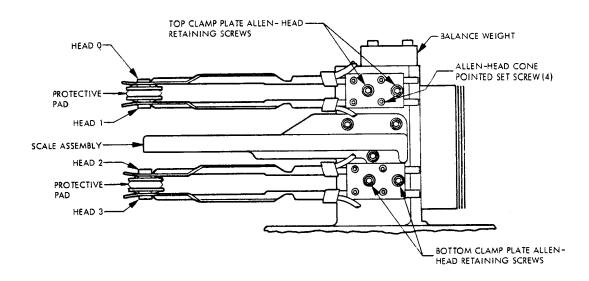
Heads Installed on Positioner Carriage (200 tpi)
